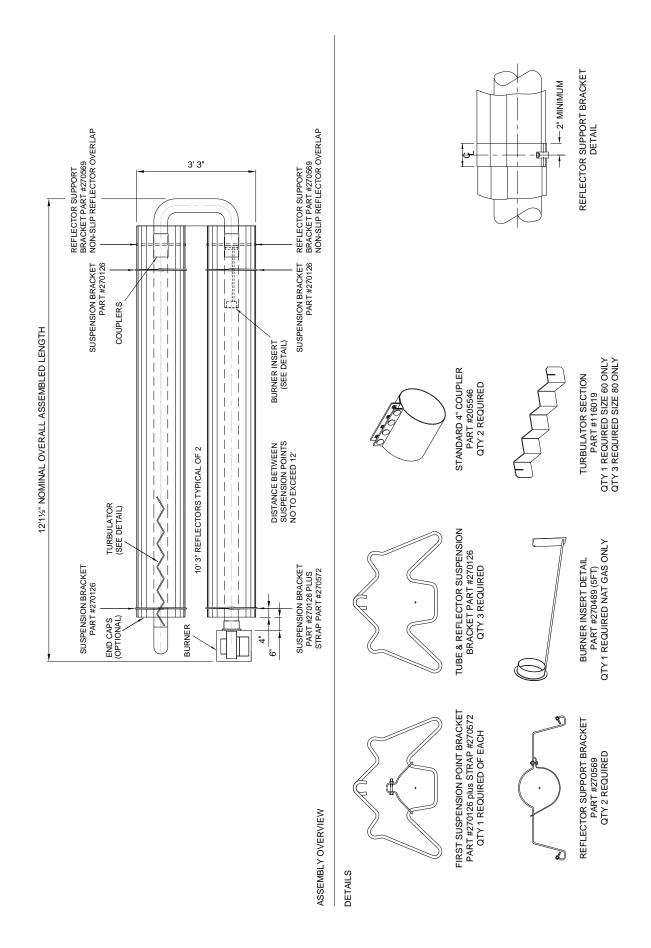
Heater Assembly: Model U tube 60-U40, 80-U40, 100-U40, 125-U40 and 150-U40
